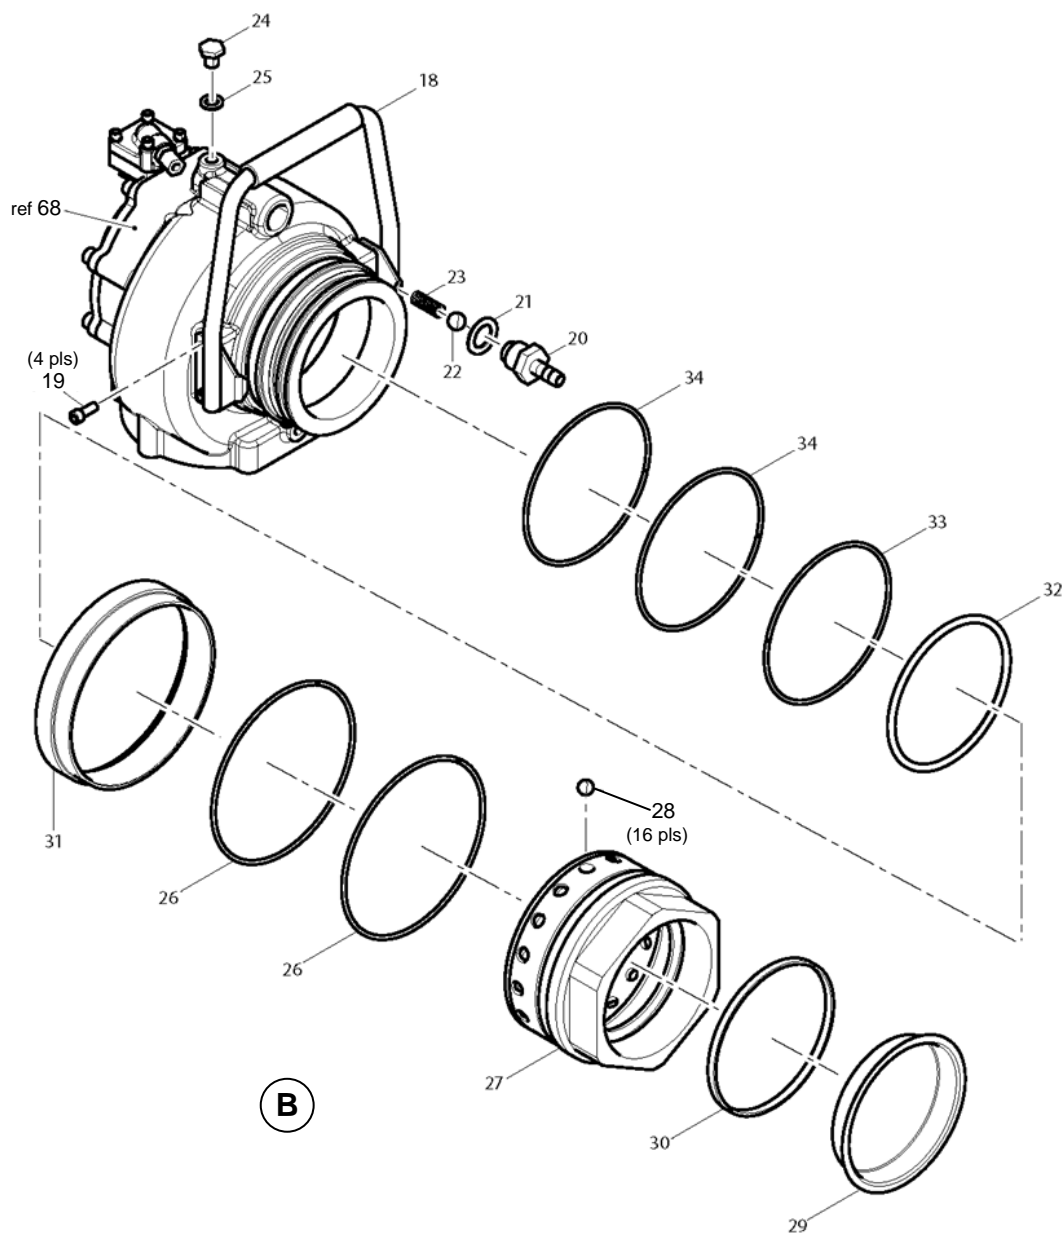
Valve Assembly, Pressure Control, 4 Inch Intake
